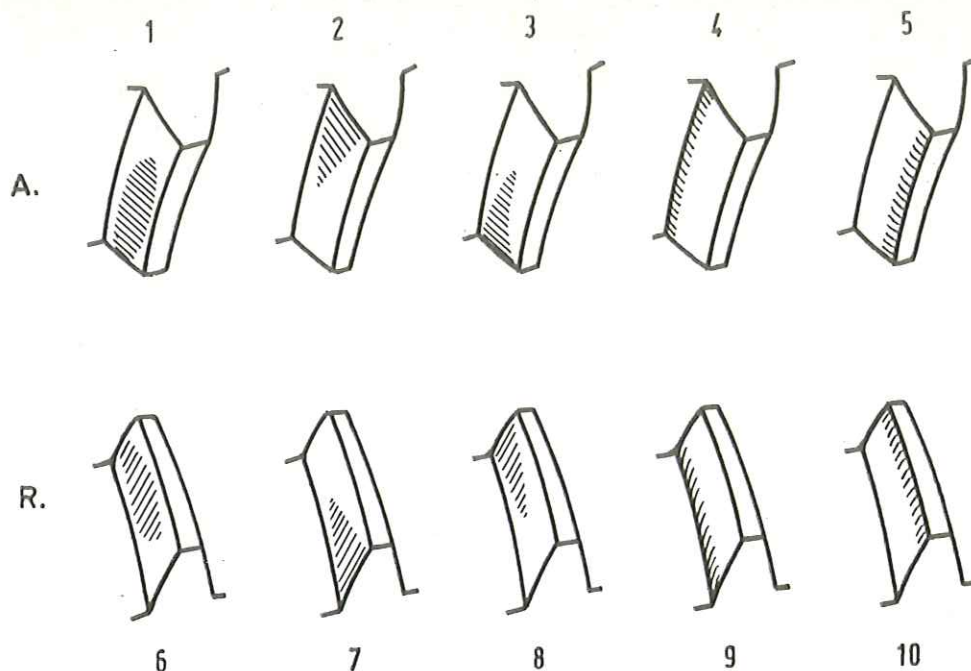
Transmission bevel pinion and ring gear tooth bearing.
